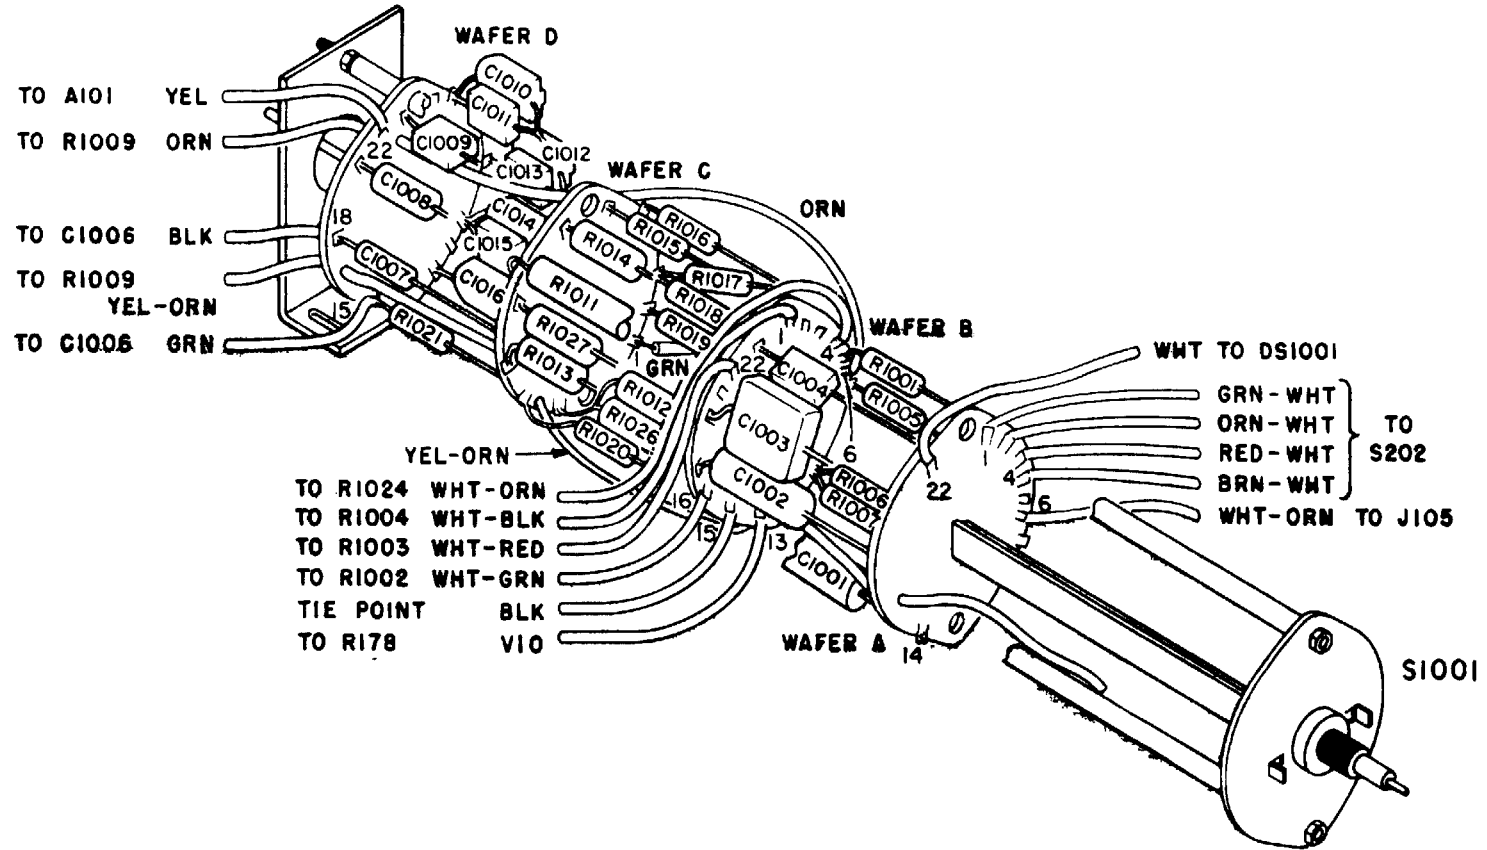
A. Sweep Time Switch Assembly A1001 Location of Parts
